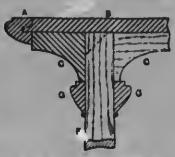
Vertical Section of Top of Columnar Stand.
